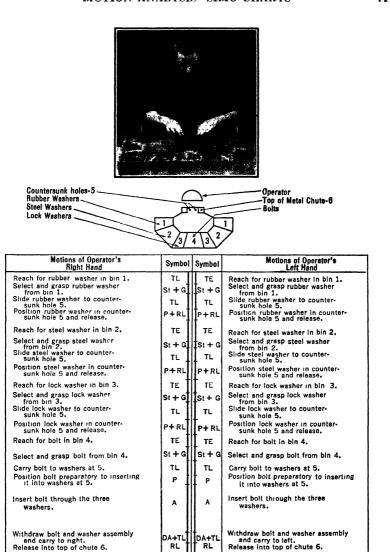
Simo chart of bolt and washer assembly—improved method. Output 18 assemblies per minute.
